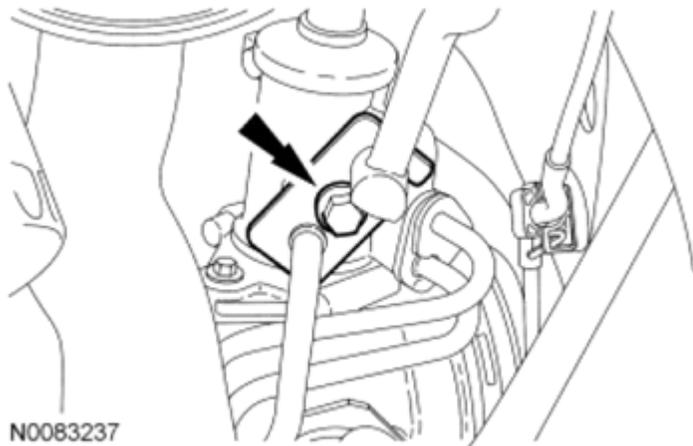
Locating Power Steering Fluid Tubes And Bolt
